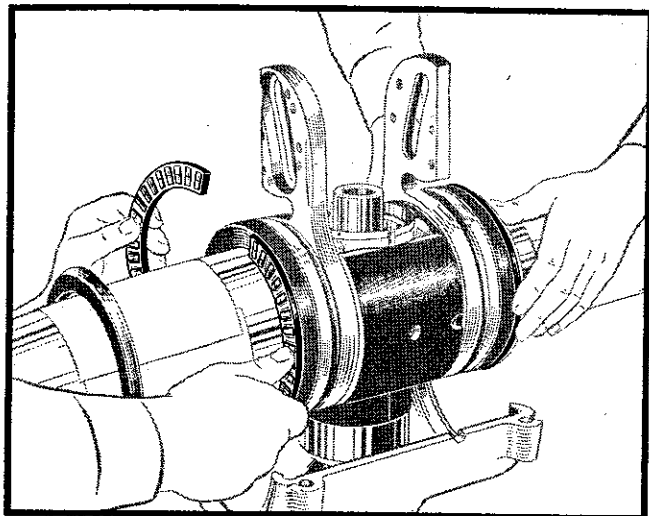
Inserting Thrust Bearing Retainer Assemblies
